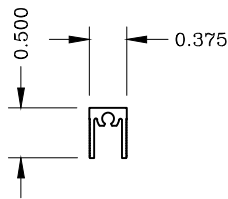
/2 Scale – For Custom Size Drawing Contact Graham
